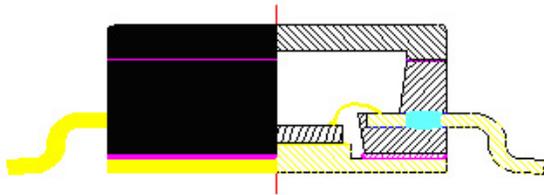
Representative R-Pak package cross section illustrating the internal cavity with a wirebonded die on a metal package base
